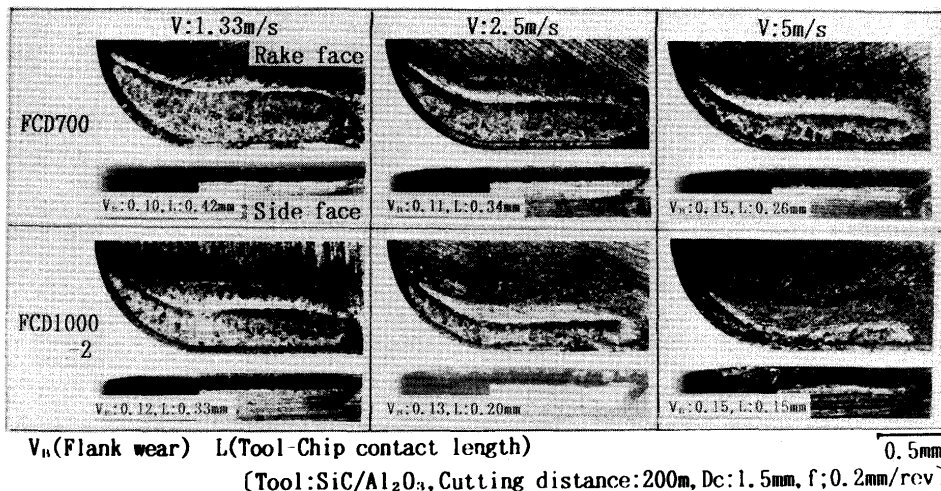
Tool wear at various cutting speed in machining of FCD700 and FCD1000-2.
